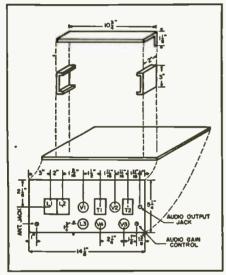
Exploded view of chassis and front panel dimensions. Material is 1/16" thick.
